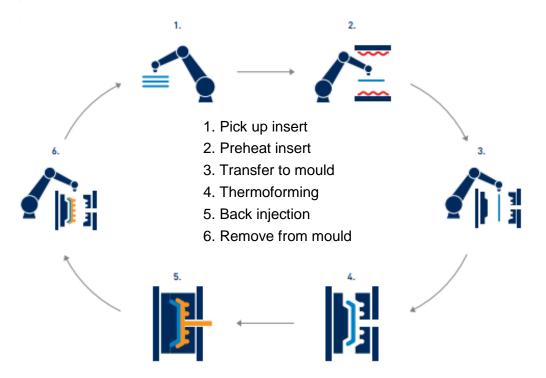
Step process of thermoforming combined with injection moulding. [Kra17]
